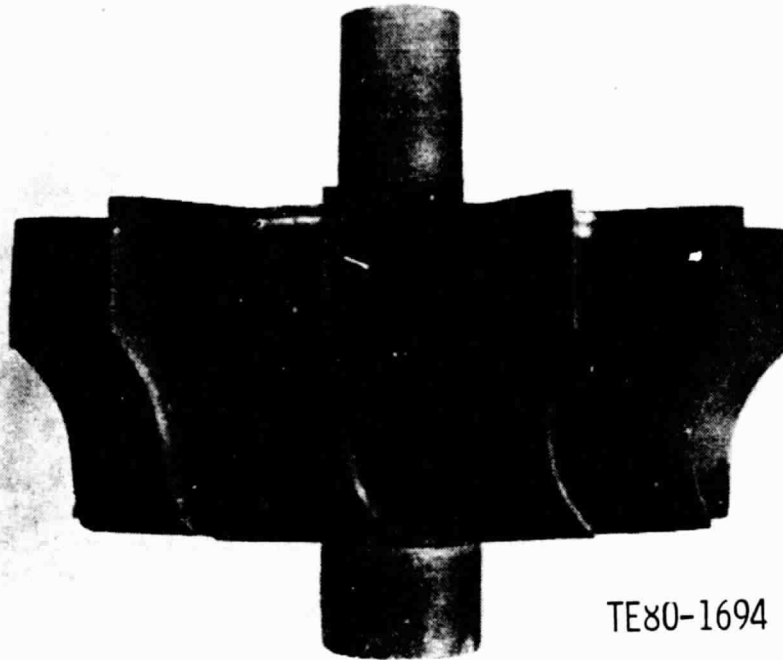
DDA Truck Turbocharger and Cast Ultrasonic Machining Tools.
